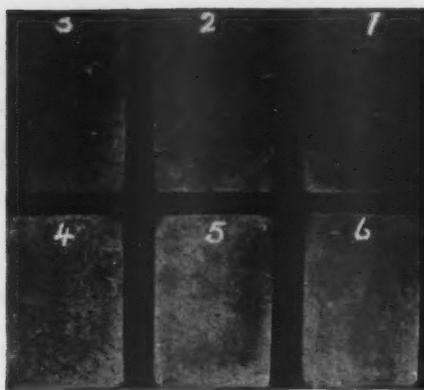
SPECIMEN CASTINGS OF TABLE 7. REMOVED FROM MOLDS AND WIRE-BRUSH CLEANED.
